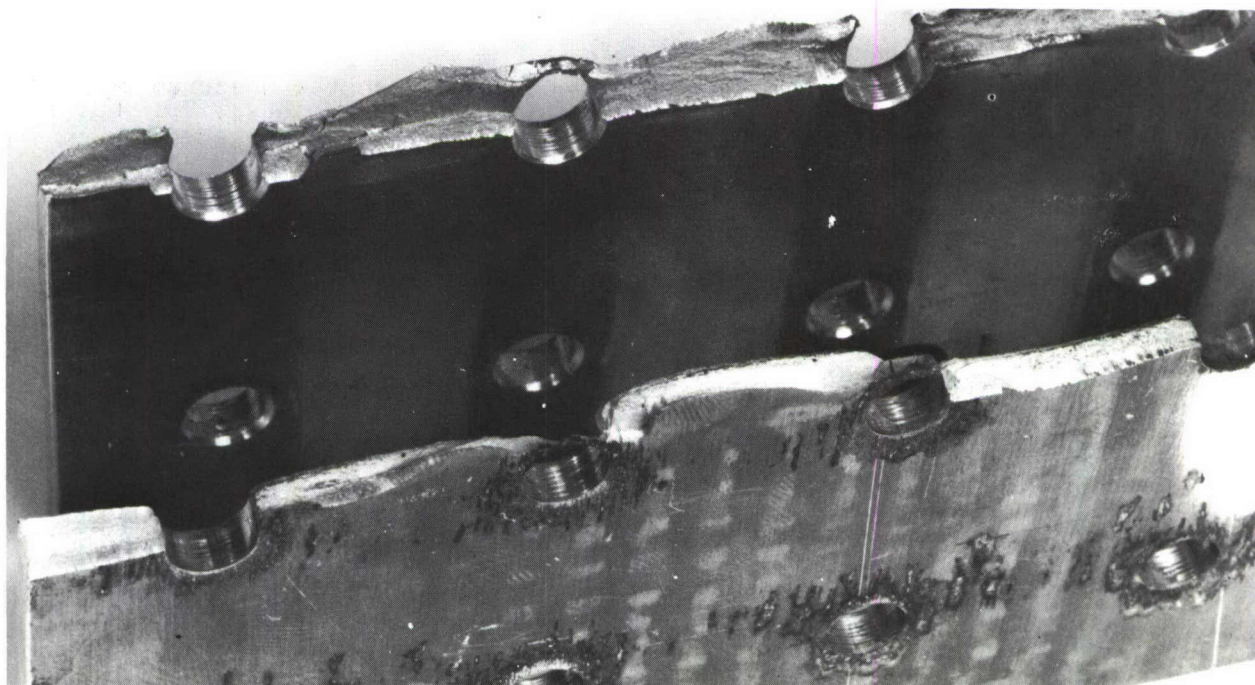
Fretting Crack Origins in the Skin Near the Hole Periphery in Specimen 4.7-12 (Front) and 4.7-13.
